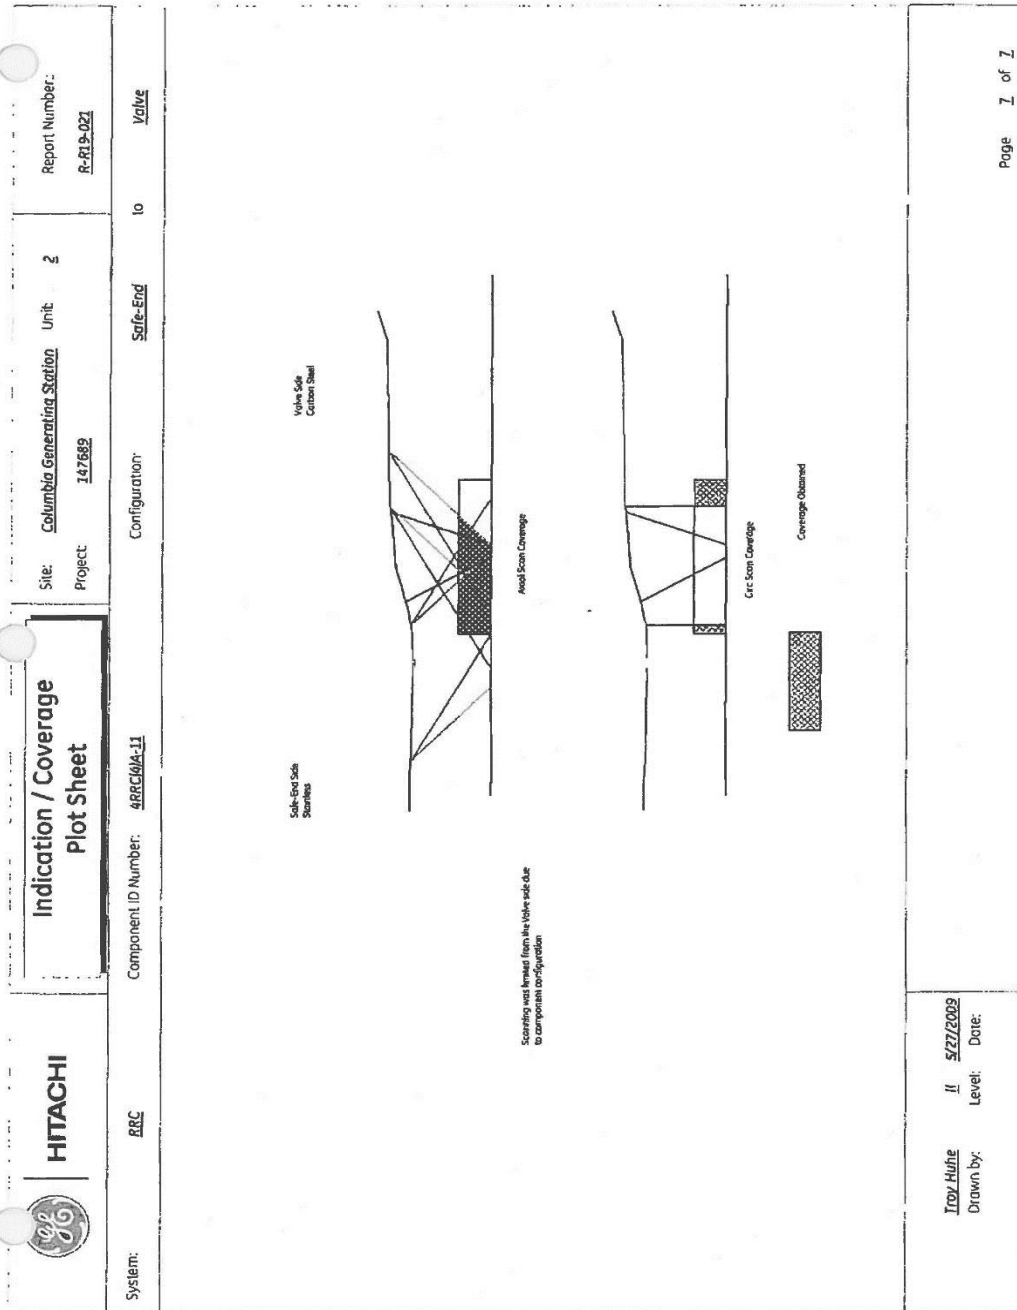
ISI-17.1 Valve body associated with welds 4RRC(4)A-11 and 4RRC(4)B-12
